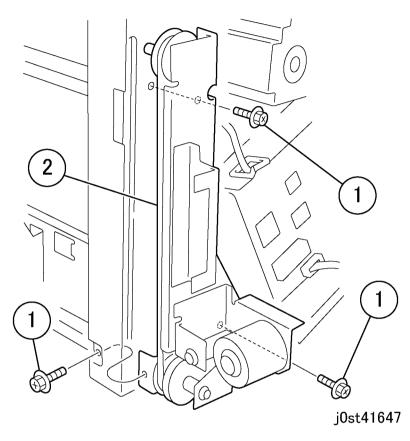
Removing the Elevator Belt Assembly (j0st41647)
